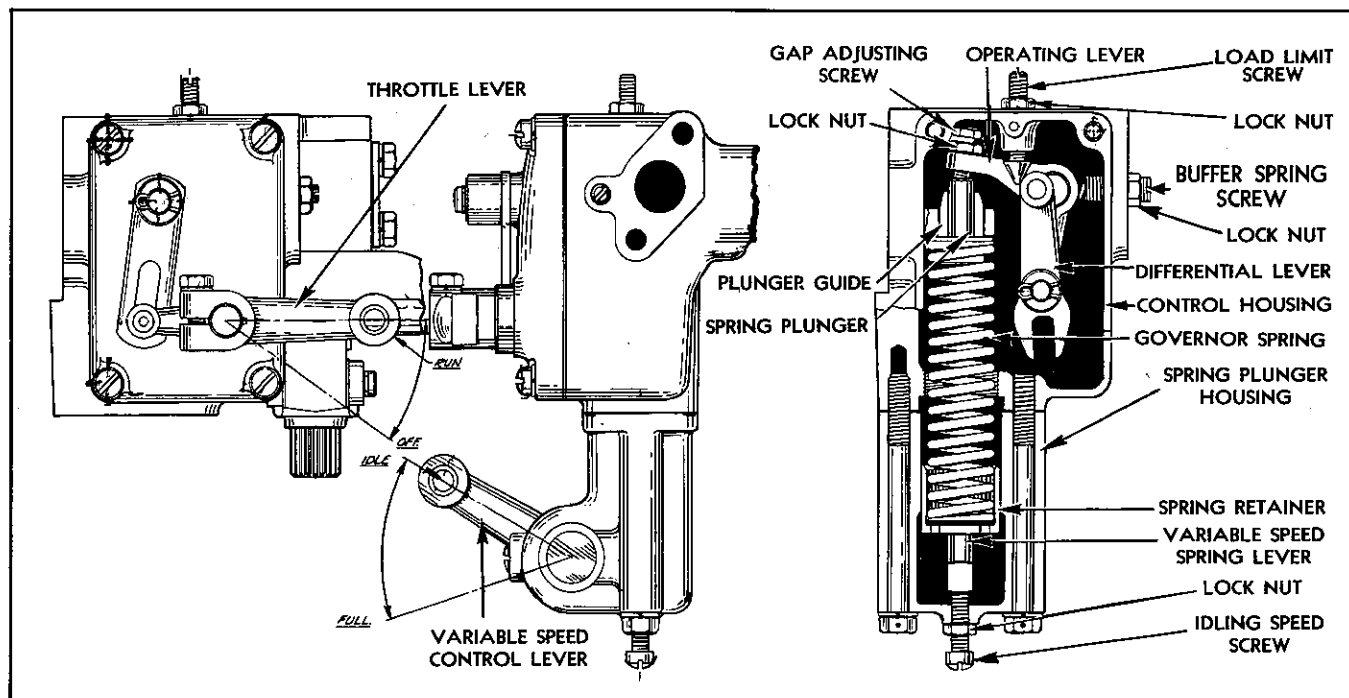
Variable Speed Mechanical Governor Spring Control and Cover Assembly.
